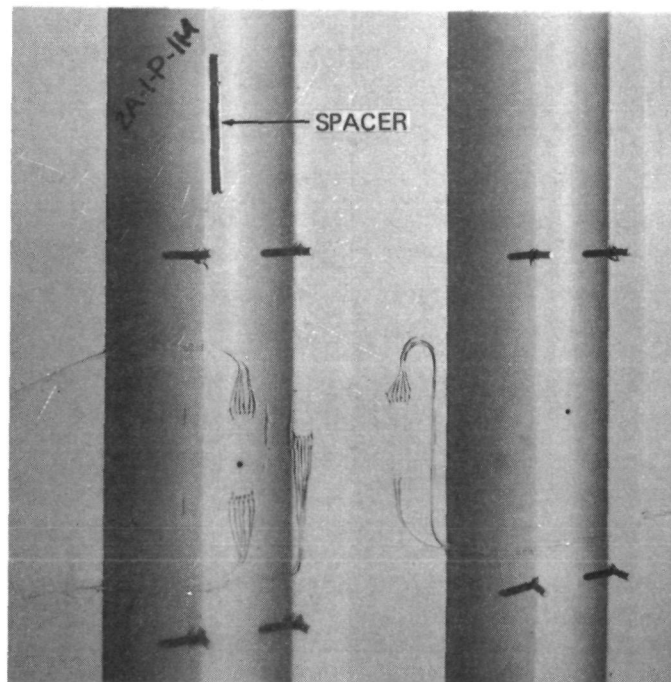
PANEL 2A-1-P-1M AND MACHINED SPACER
